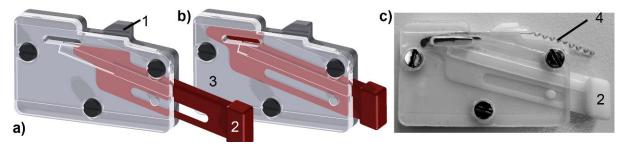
Straightening Tool. (a, b) Rendered CAD drawing of the straightening tool with housing (1) including a form-locking interface for grabbing the Hybrid-M electrode carrier. A movable slider (2) allows straightening of the curved electrode array. The transparent cover plate (3) enables visual control. (c) Prototype of the Straightening Tool with Hybrid-M (4) inside.
